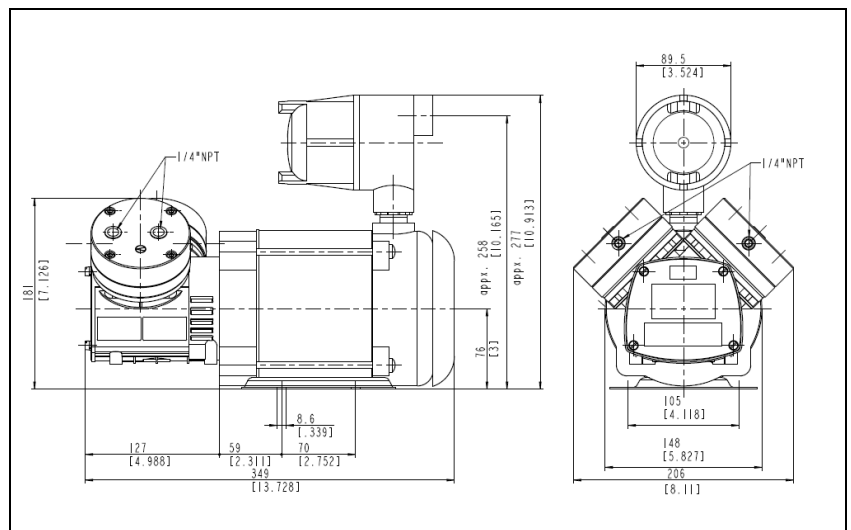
Mounting dimensions UN026_S_I EX including .9 versions. See head connection diagram. (All dimensional tolerances conform to DIN ISO 2768-1, Tolerance Class V)
